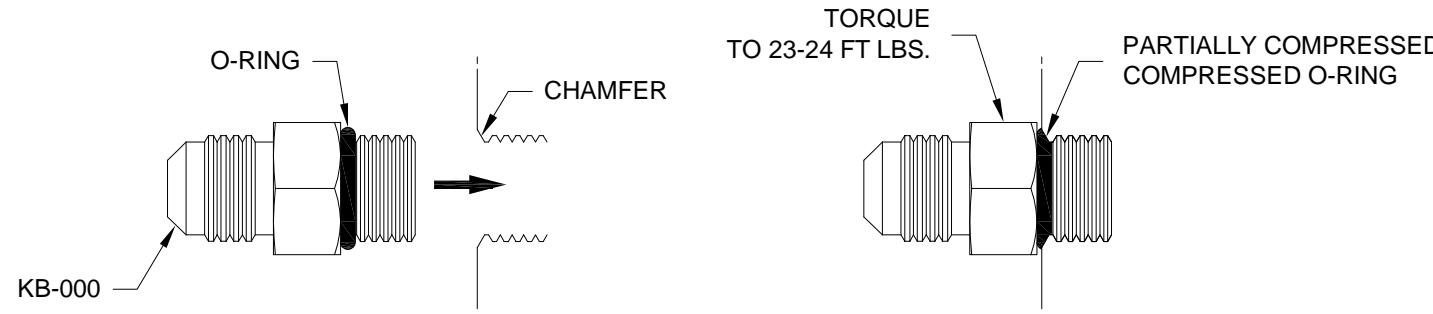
STRAIGHT-TYPE STRAIGHT THREAD FLUID FITTING
